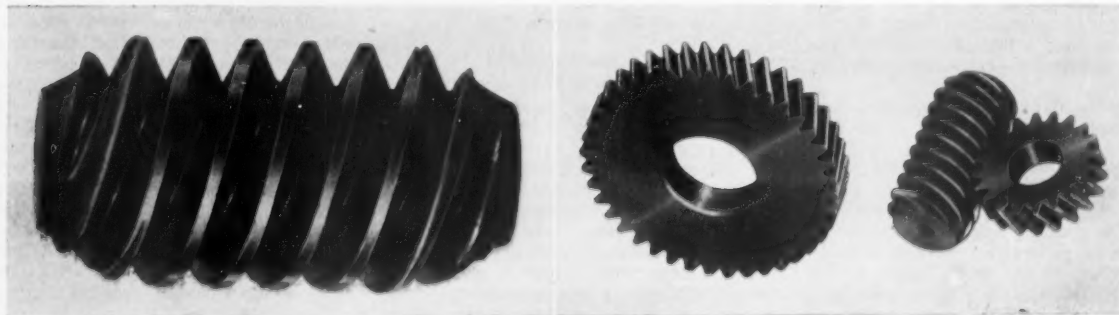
A deep Acme thread, left, and gear forms rolled on the B.S.A. machine
